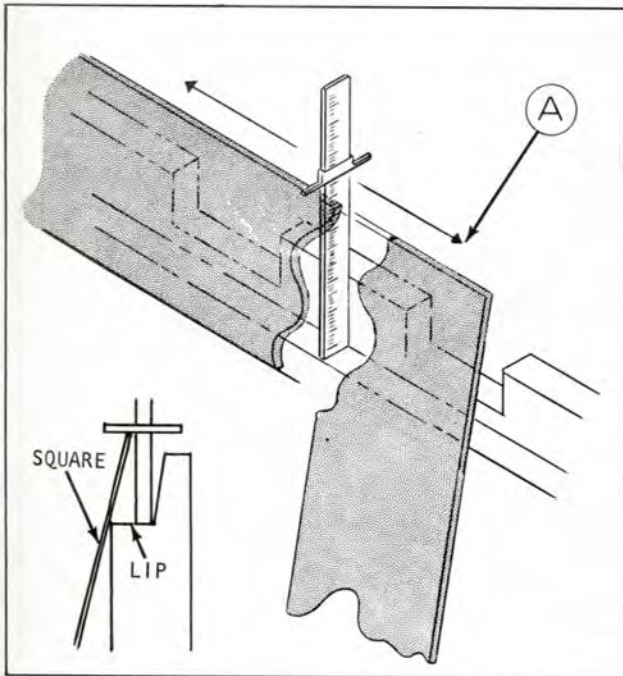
Squaring Carriage Rollers (Six Roller Carriage)
